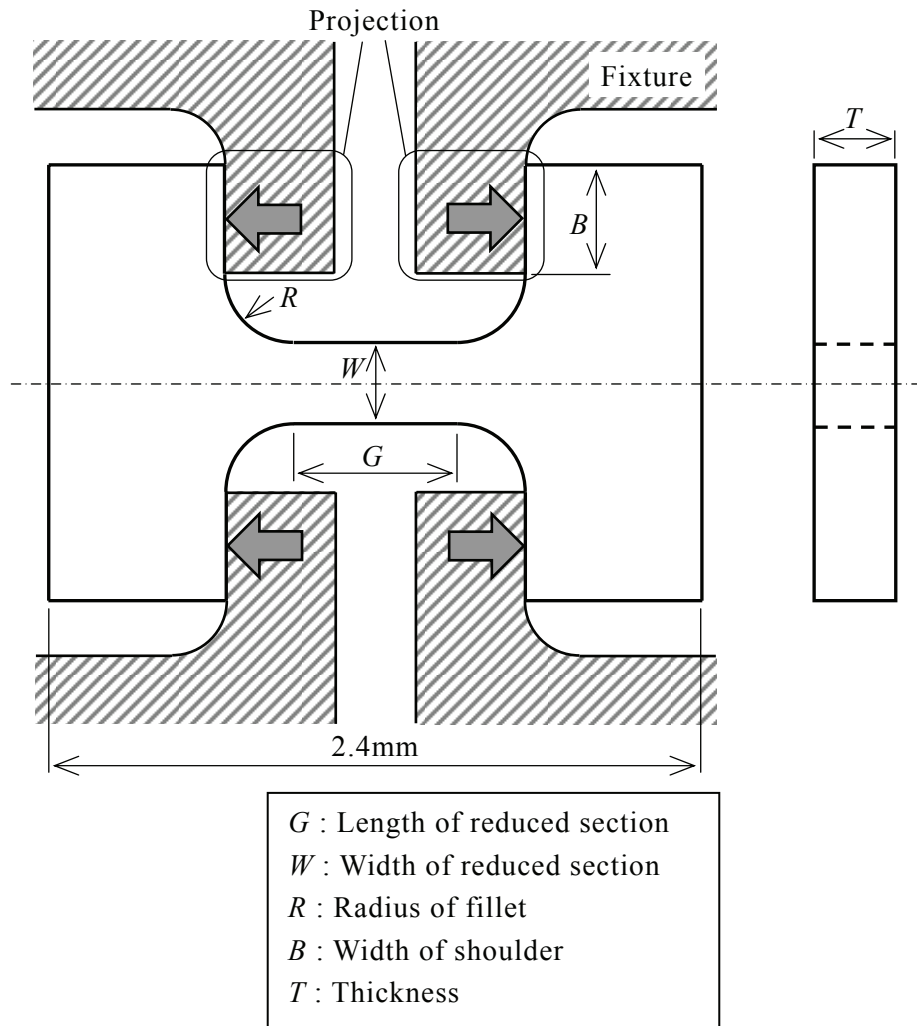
Schematic illustration of shape and dimension of small tensile specimen and testing fixtures.
